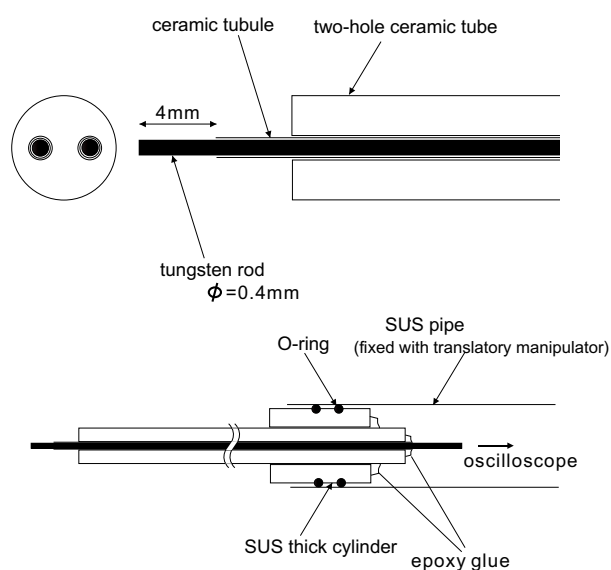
Drawing of Double Probe Used on Mini-RT
